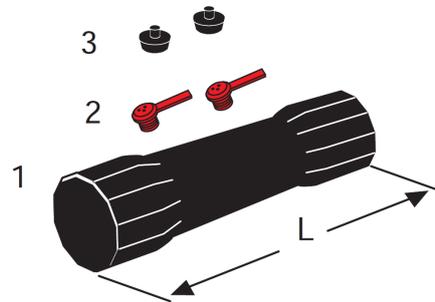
SX-WP Joint. $L = 650$ mm. 1: Shrink Sleeve, 2: Venting Plugs, 3: Weld Plugs. [25]
